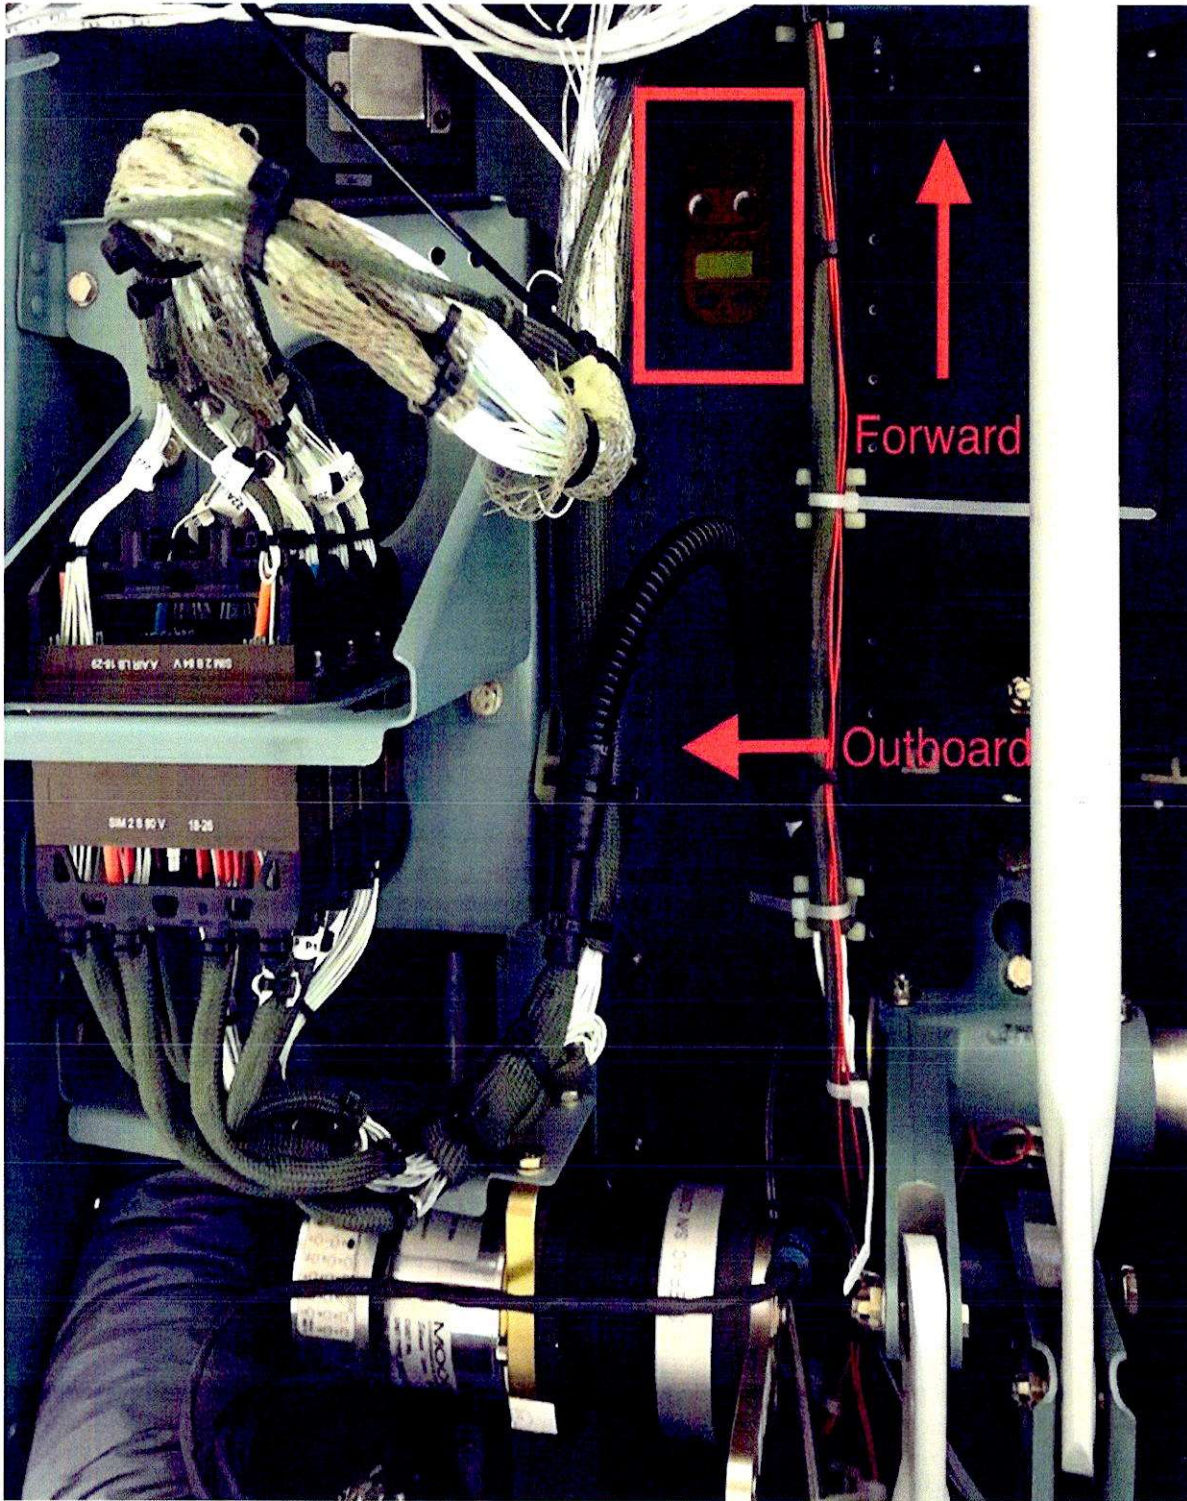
UNDER COCKPIT FLOOR LOOKING UP
